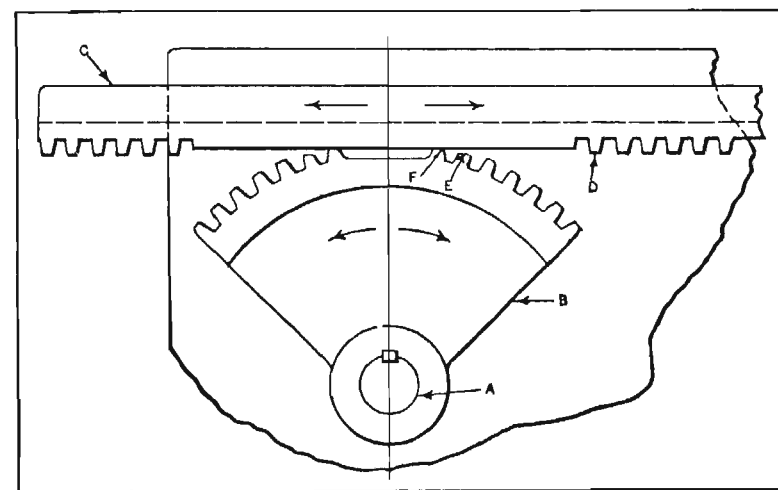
Reciprocating Rack which Engages Segment Gear at Each End of Its Stroke
